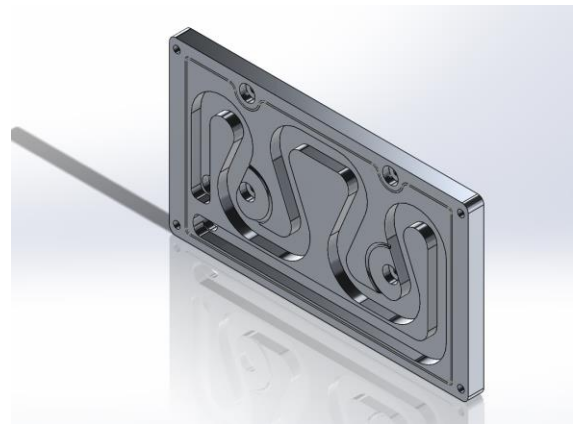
Solidworks drawing of liquid cooling plate for motor controller.
